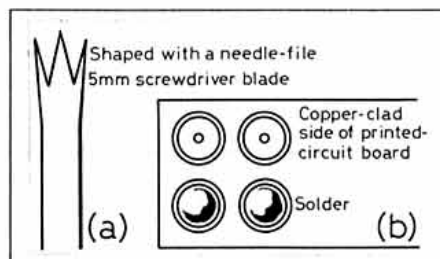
(a) G4XHE's simple tool used to cut 'islands' directly on PC boards. It consists of a good-quality 5mm screwdriver blade modified with a needle file to the shape of a three-pronged fork. (b) Results before and after soldering. The tool forms an insulated 'moat' around the 'island'.
